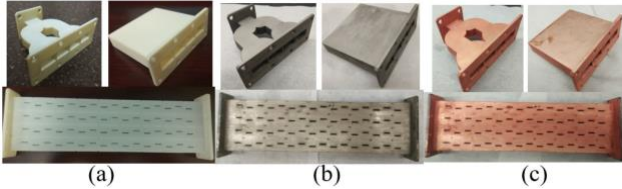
Fabricated power divider, termination fixture, and waveguide array showing (a) 3-D-printed parts before metallization, (b) after Ni electroless plating, and (c) after Cu electroplating.
